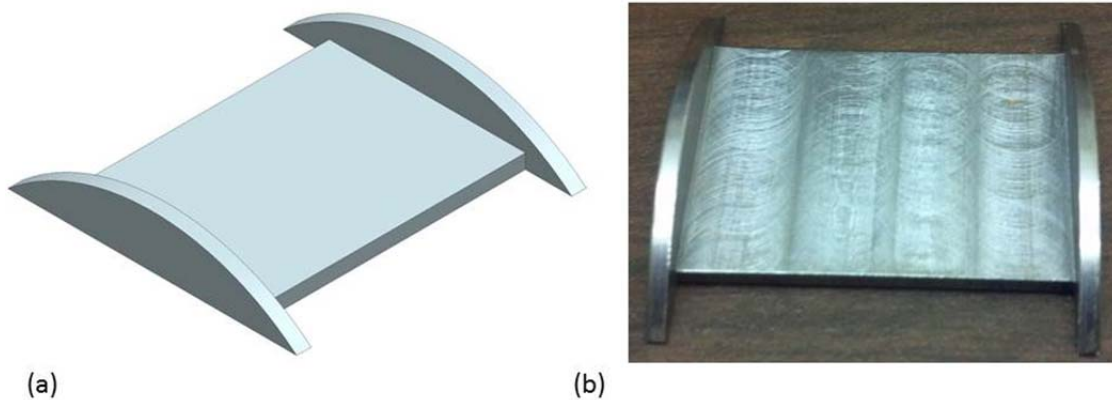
Steel heater frame illustrations: (a) CAD model, (b) actual frame used for one heater.
